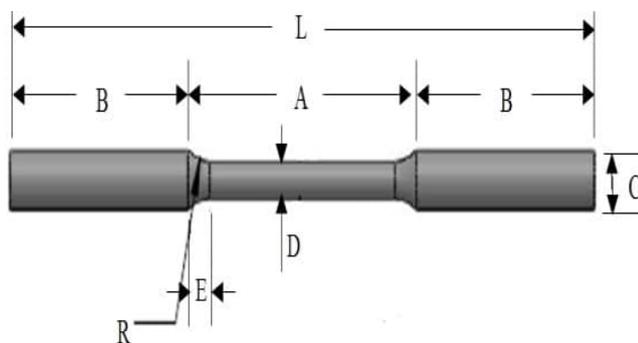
Dimensions of The ASTM E8 standard tensile test specimens
